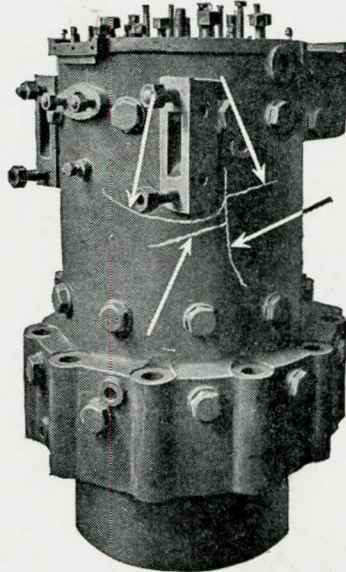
This marine Diesel engine cylinder was extensively cracked in the water jacket. The fractures were dealt with quickly by scientific welding enabling much time and money to be saved.
